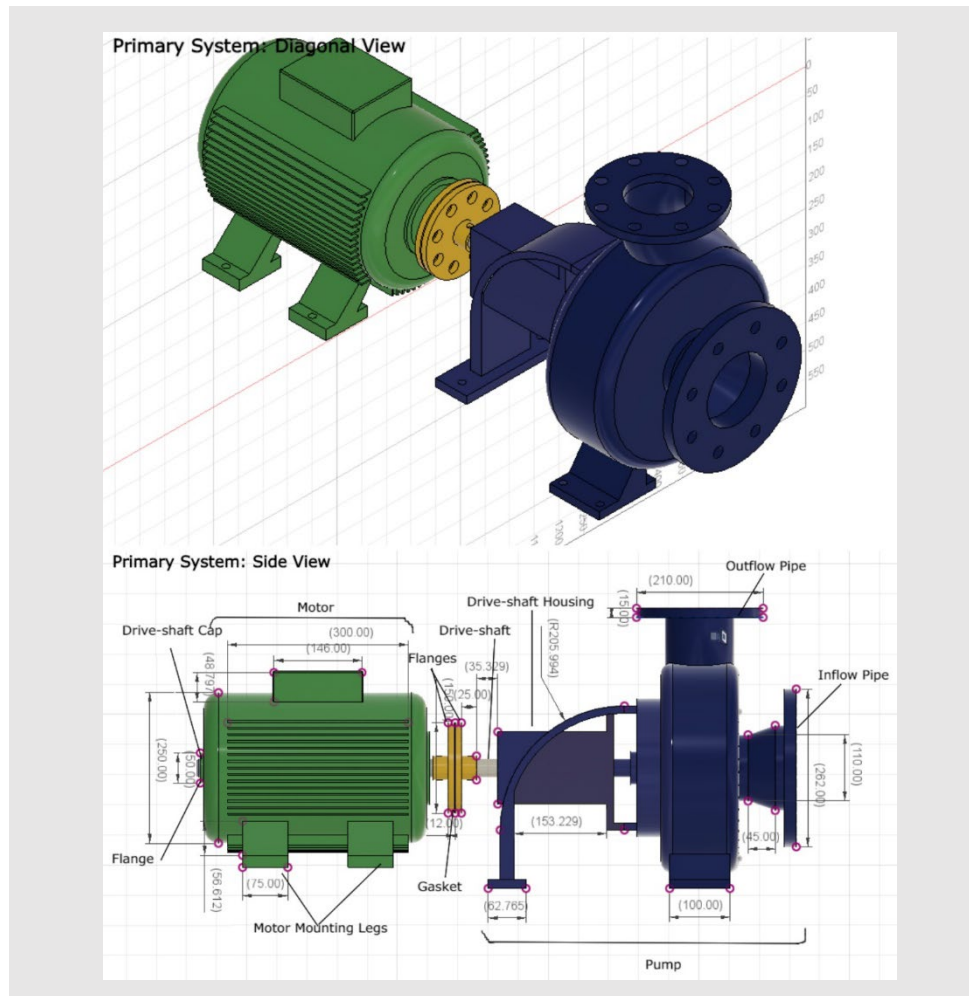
CDC's water collection system - the motor and the centrifugal diffuser pump - drawn using CAD and dimensioned in mm.
